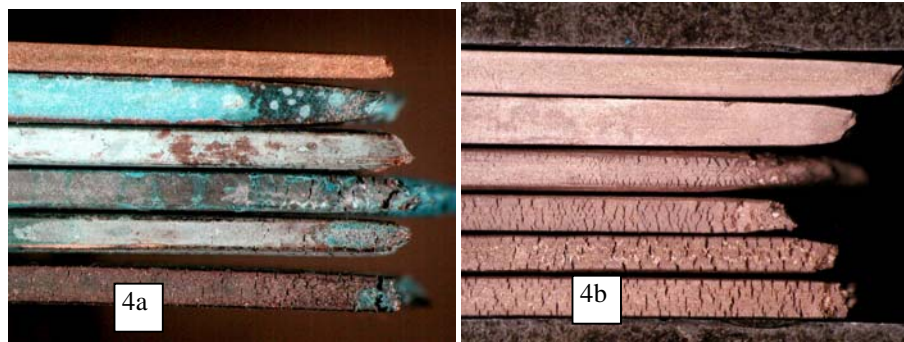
Side view cracks (top to bottom) air & 1% to 12.5% ammonia (a) as tested (b) Cleaned
